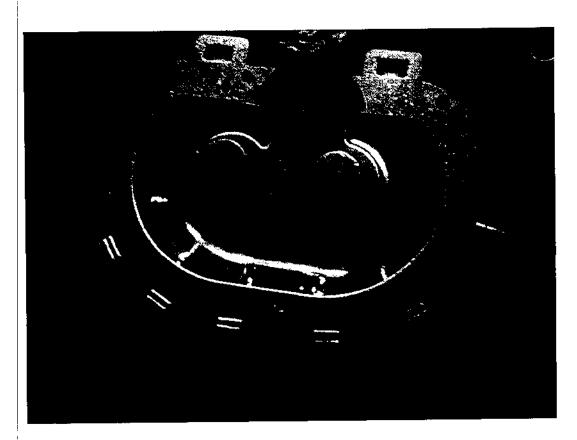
COPE PATTERN OF FRONT BEARING HOUSING
